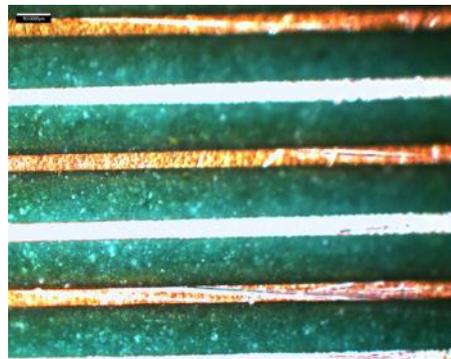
Microscopic darkfield illustration of comb structure on TV3 Layer 1, Solder mask layer removed by grinding
